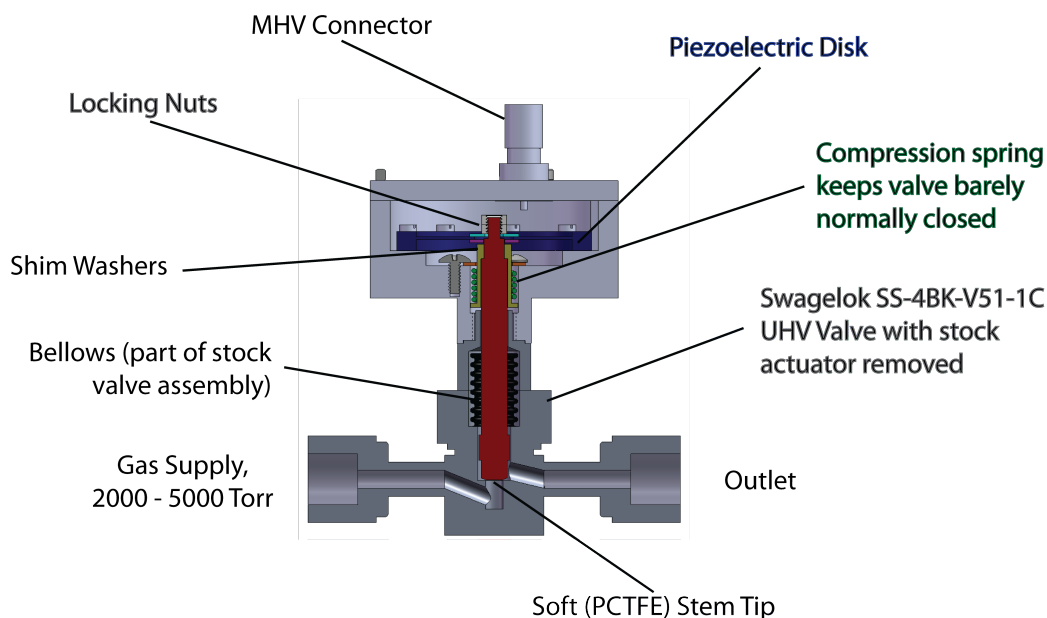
Cutaway CAD rendering of the valve assembly with pertinent details labeled.
